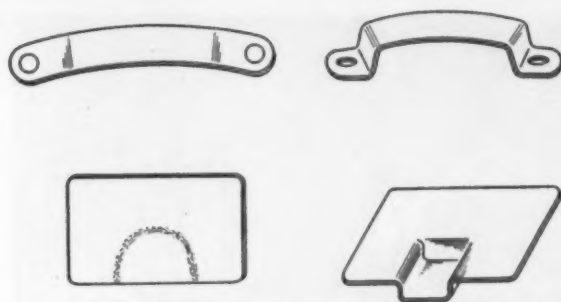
Examples of sheet steel parts which lend themselves to selective annealing prior to forming.
